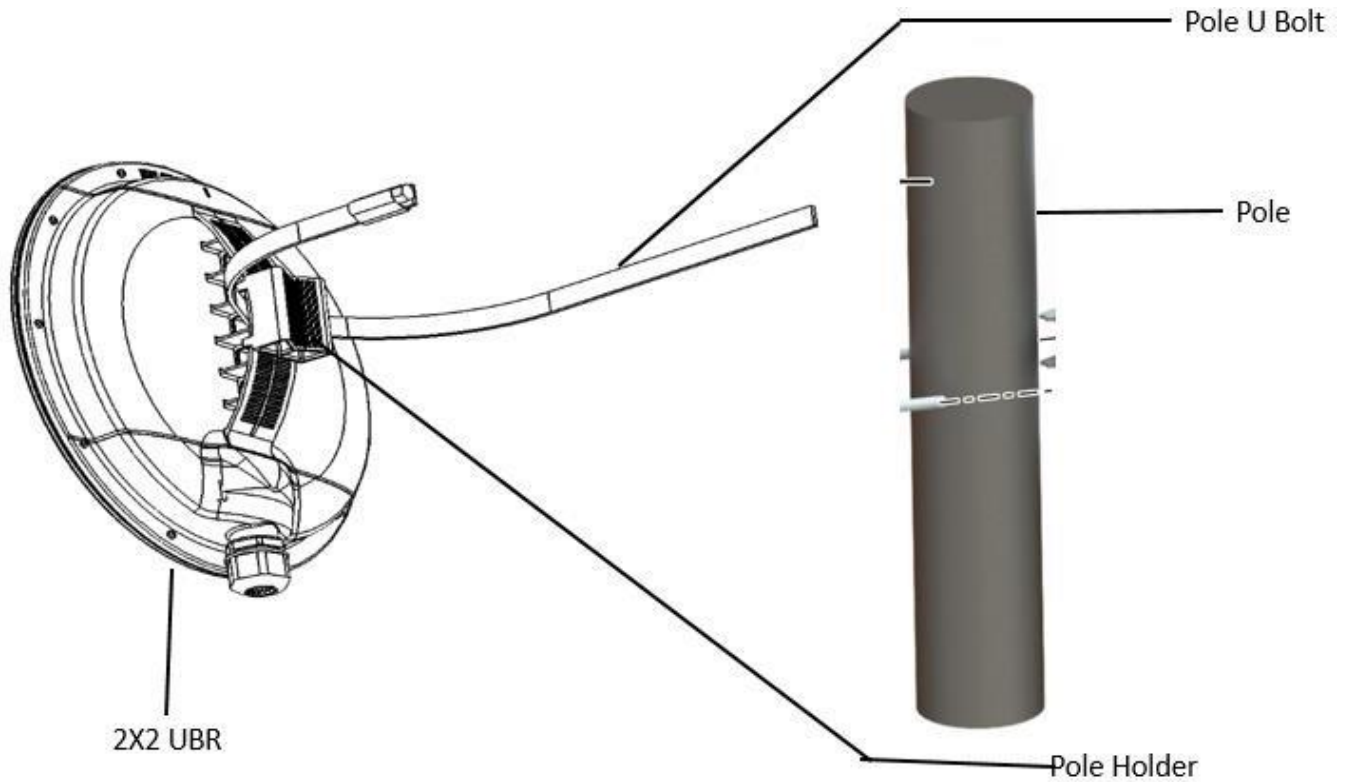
Overview of the 2x2 UBR (CPE) device with pole and mounting bracket attaching parts
